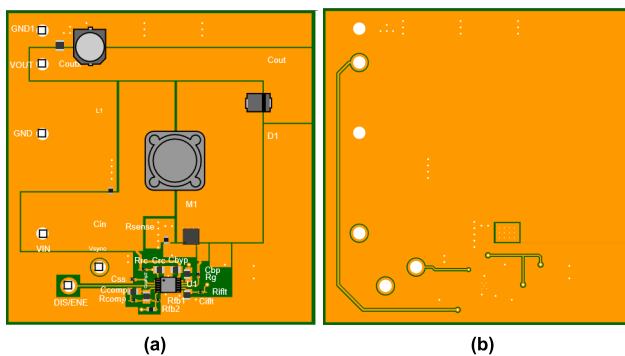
Layout maps of the power-supply PCB generated from the online tool: (a) Top side, (b) Bottom side.
